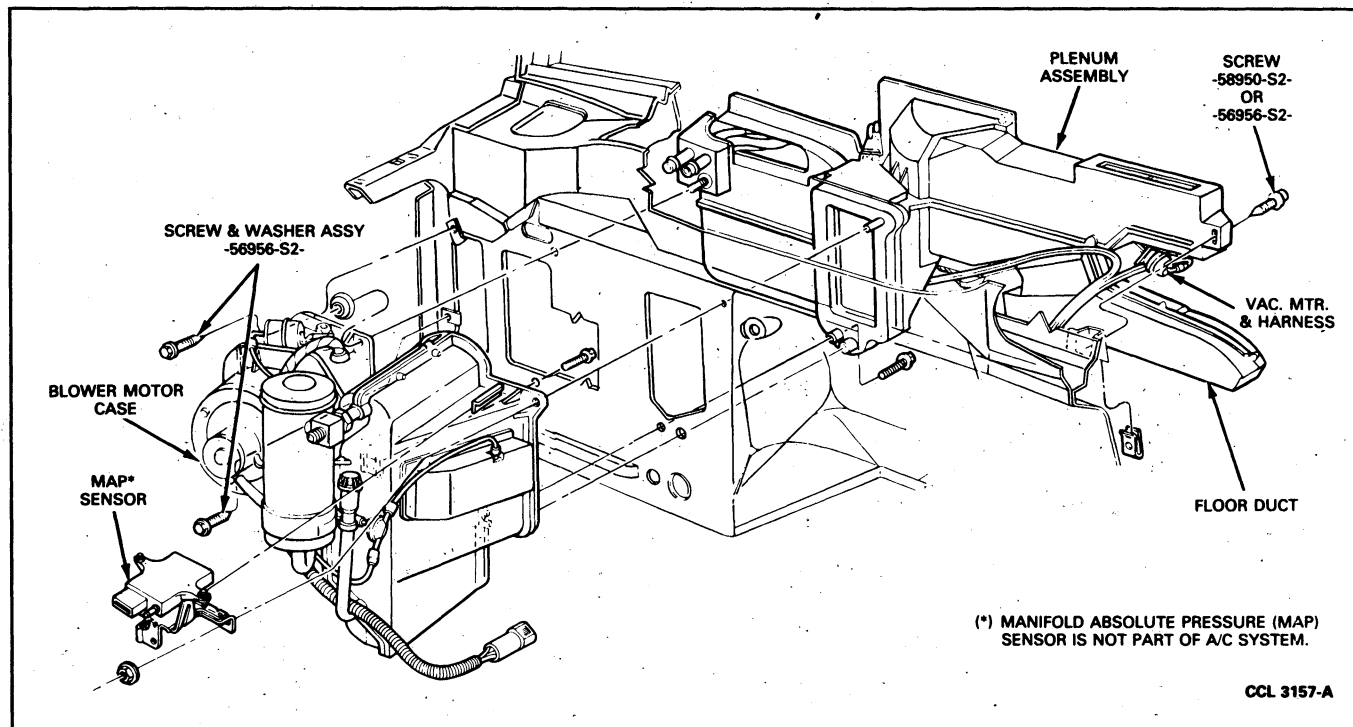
Assembly of Evaporator Case and Plenum Assemblies
